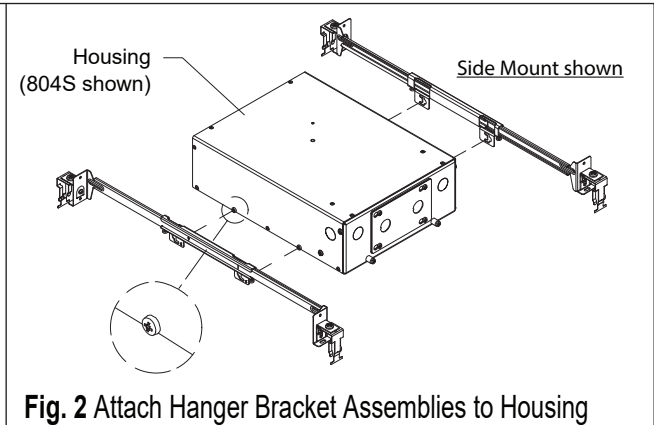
Attach Hanger Bracket Assemblies to Housing
